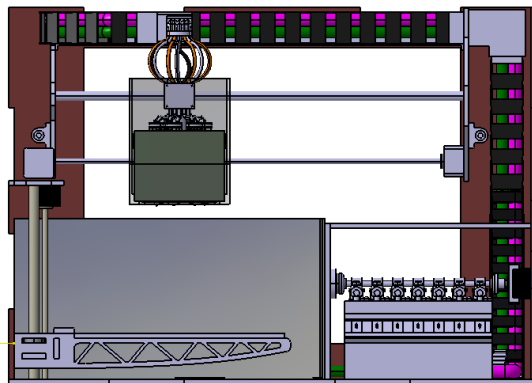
M²-3D Printer Machine Design Layout – Front View
